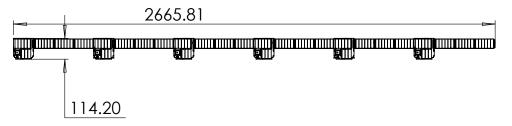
ThinSat 6T Spacecraft, Dimensions in mm
